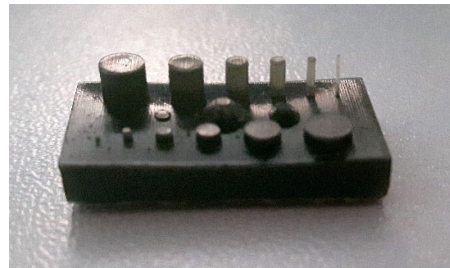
Pattern test geometry printed with Standard Blend resin in Microla SL printer.
